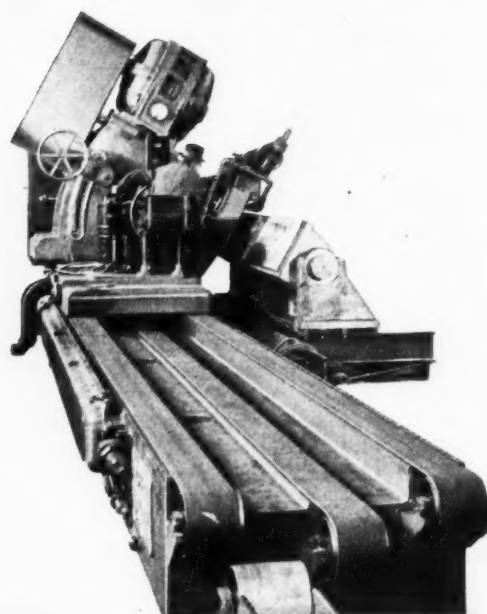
Grinder Shown in Fig. 1 Equipped for Performing Experimental Grinding Operation
